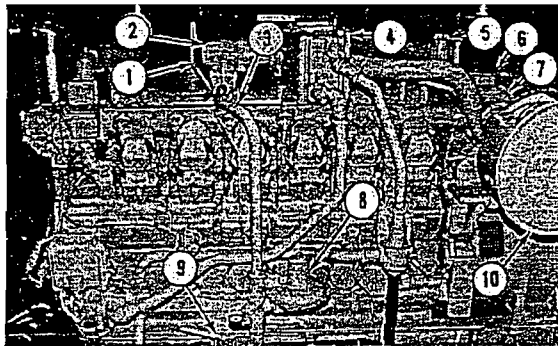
Fuel, Air Inlet And Exhaust System Components (G3512 Engine Shown)
